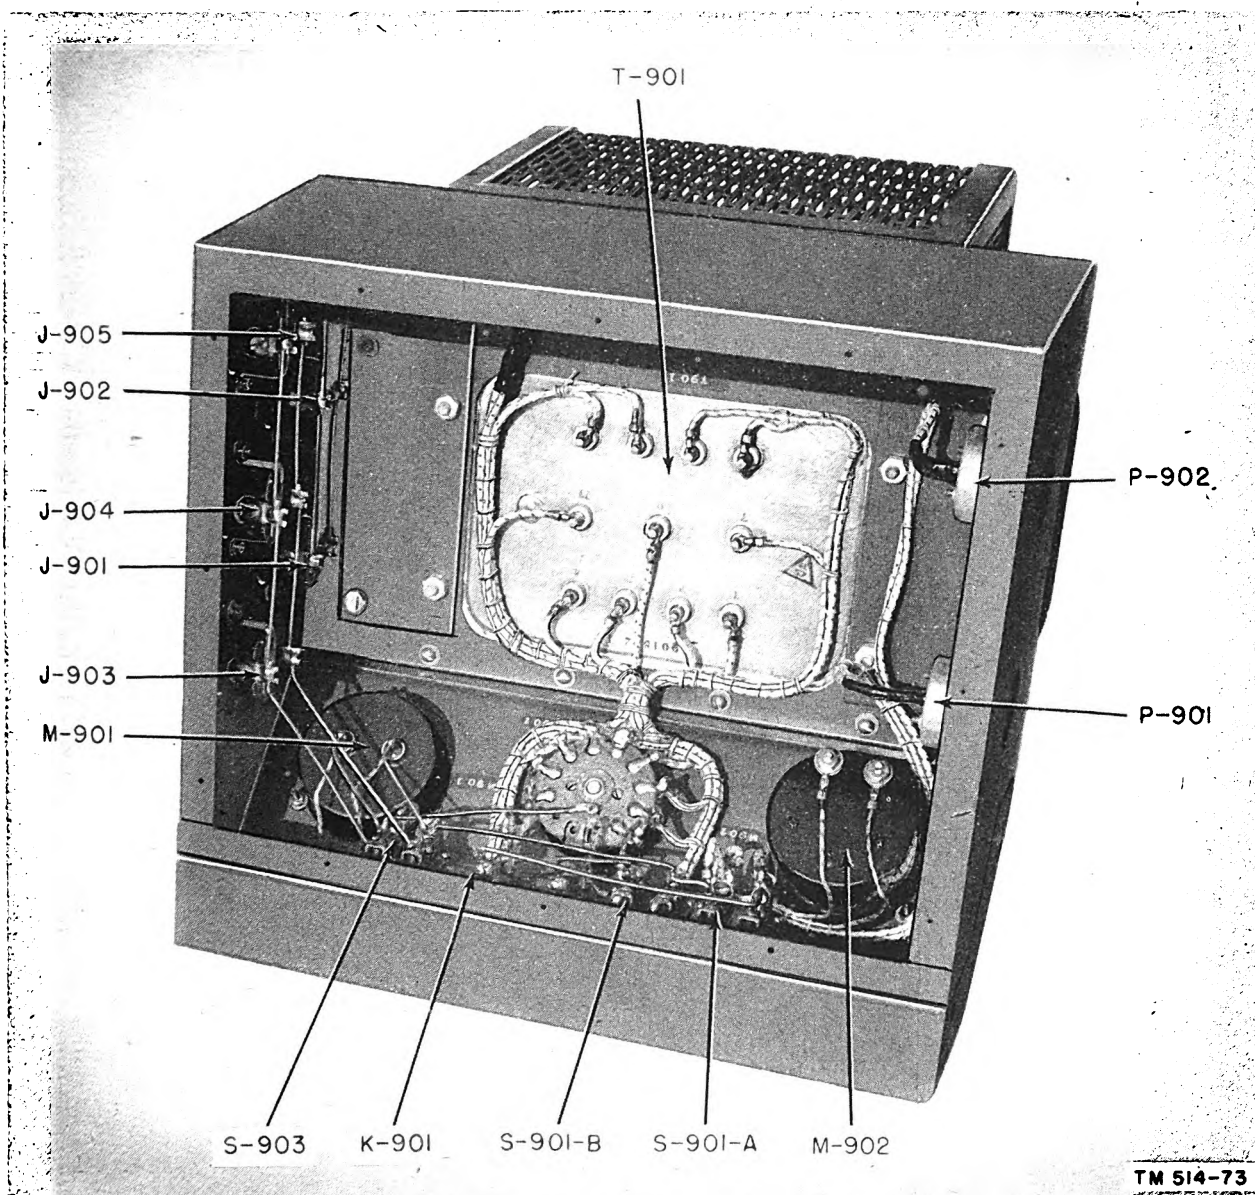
Junction Box J-95/CRD-2, bottom view of chassis.
